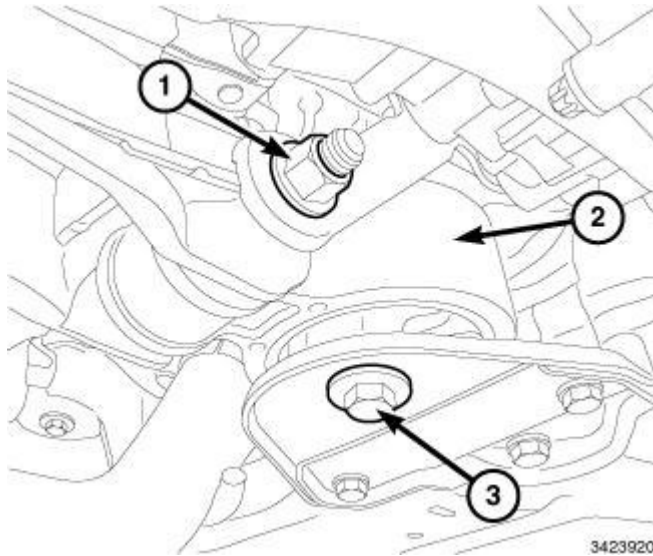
Support Bracket-To-Engine Mount Bracket Nut, Rear Mount & Bolt
